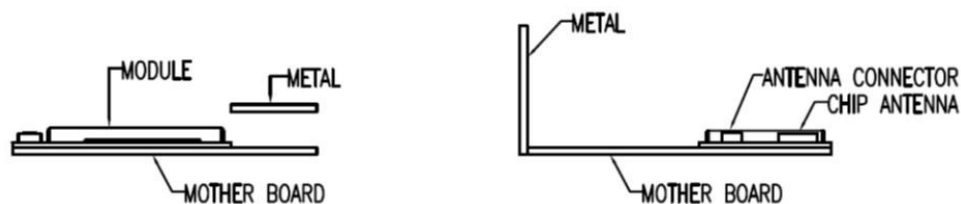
Recommended BT740-SA placement on host PCB and proximity to metal cover
